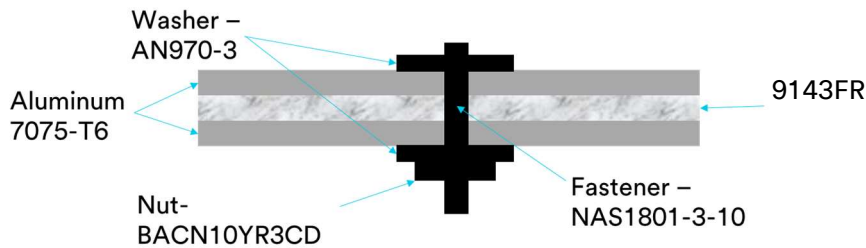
Schematic of fastened construction used in simulated floor construction salt spray testing
